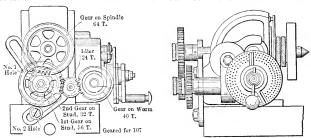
Brown & Sharpe Dividing Head Arranged for Differential Indexing
